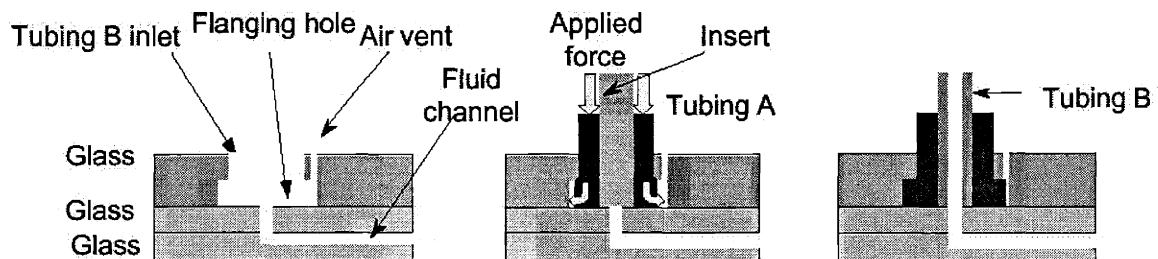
Schematic diagram of the University of Cincinnati's interconnect method: (a) bonded glass wafer assembly; (b) flanging operation; and (c) assembled view[63].
